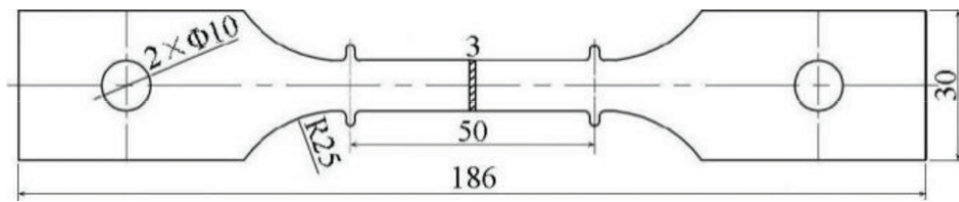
Geometry and dimensions of creep aging test specimens (unit: mm).
